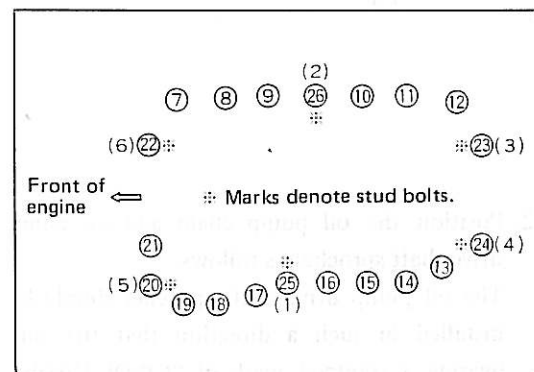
Oil Pan Attaching Bolt Tightening Sequence
